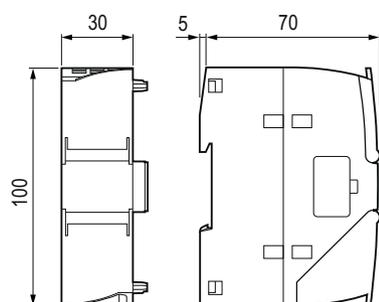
Dimension drawing of AS-i master CM 1243-2
